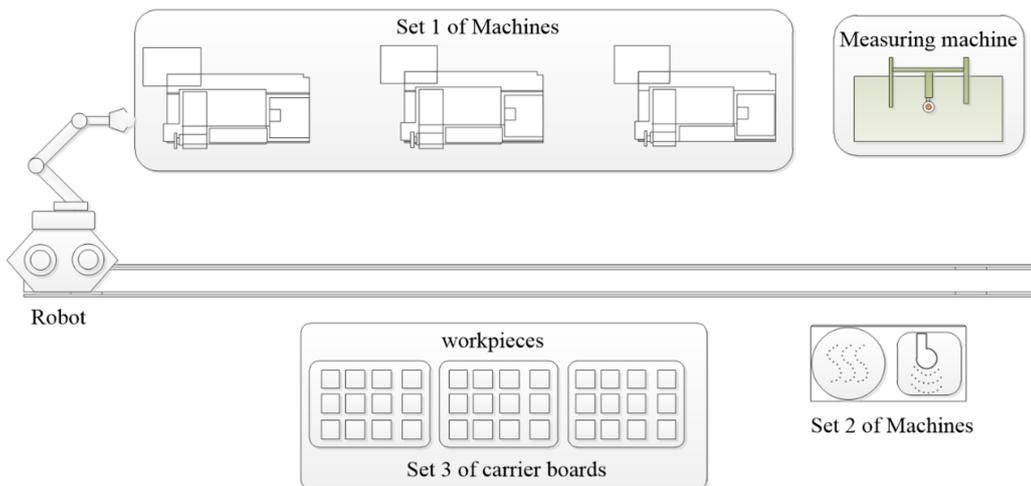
A concrete layout of FIRST Flexible Manufacturing (Sang, Xu, de Vrieze and Bai, 2020a)
